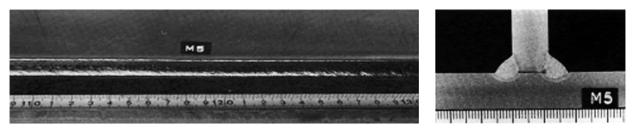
Bead appearance and cross-sectional macrograph of a fillet weld (MX-200, 1.2mmØ, 280Amp., 28-32volt, 50cm/min.)
